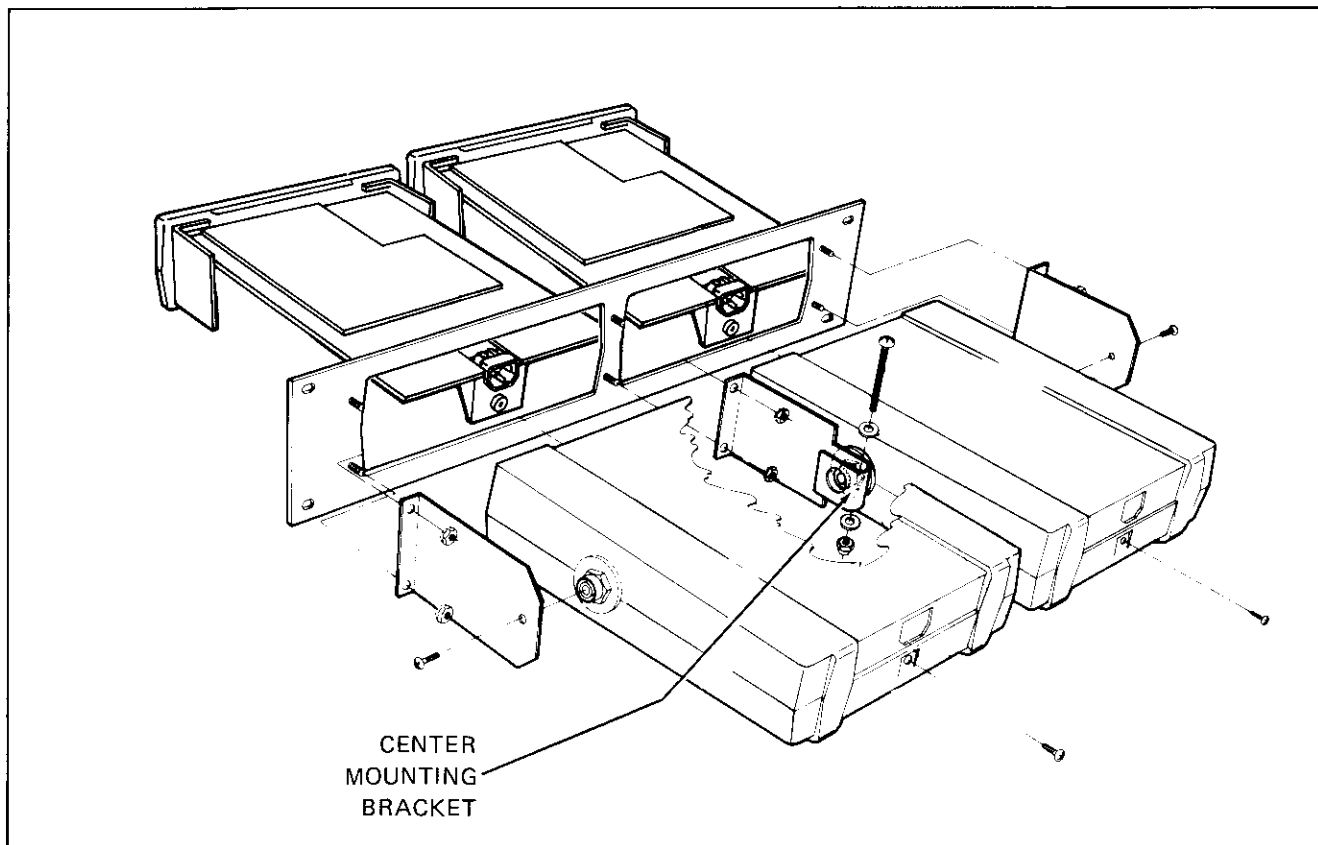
Rack Mounting Kit, Side-by-Side Mounting
